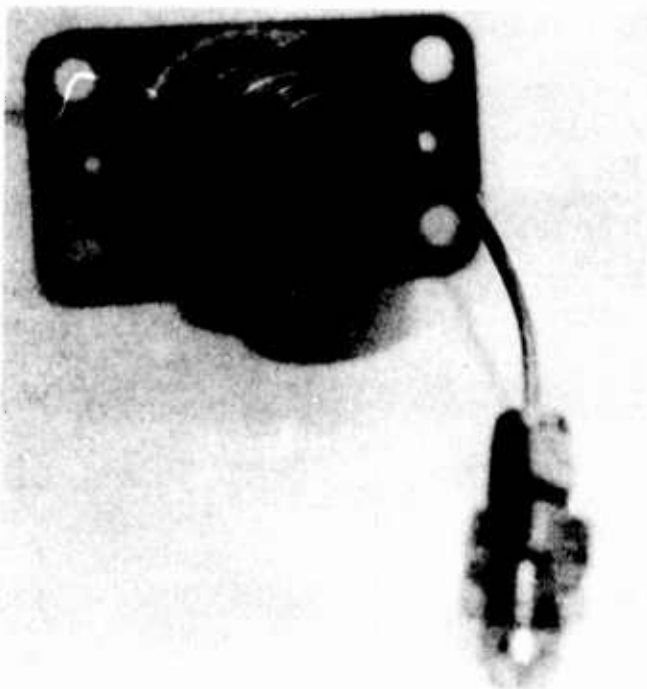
IFRT Engine No. 1, Condition of Parts after 20 Minutes
